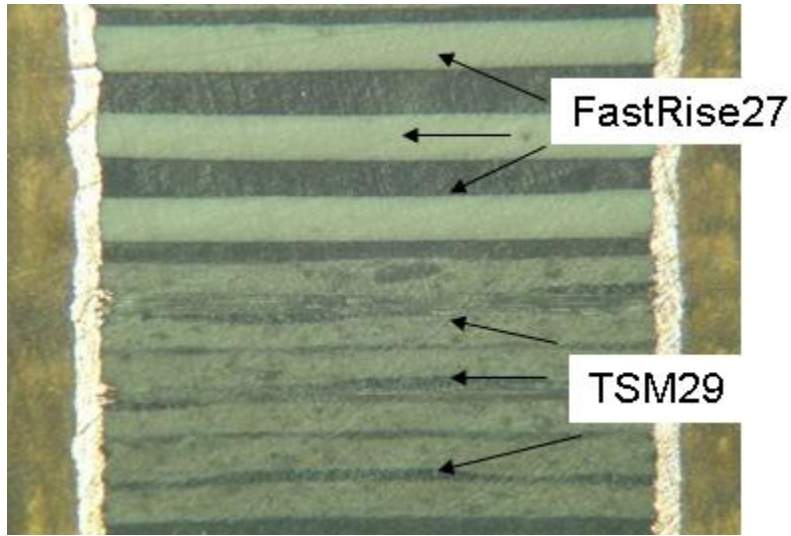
Multilayer board made with TSM-29 and *fastRise27
